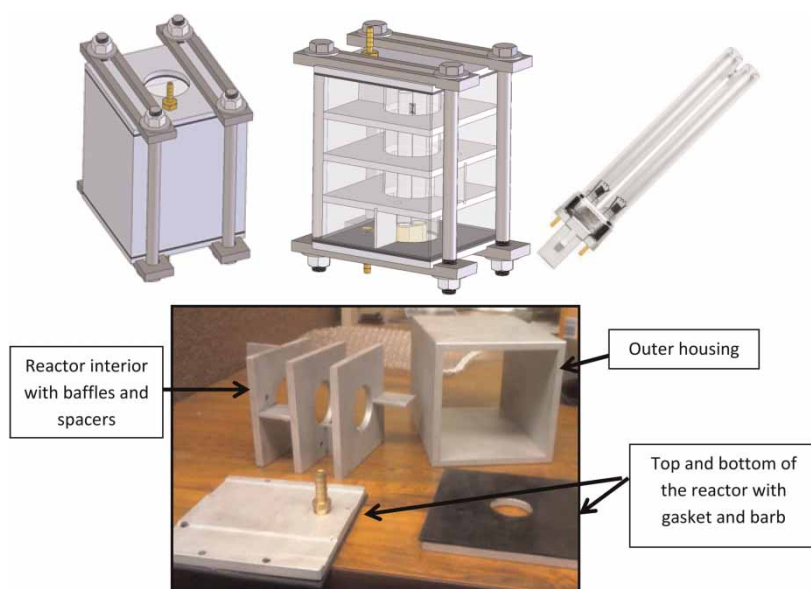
| Three-dimensional model, photo of the UV bulb (Phillips PL-S9W/TUV), and photo of the disassembled UV POU reactor.
